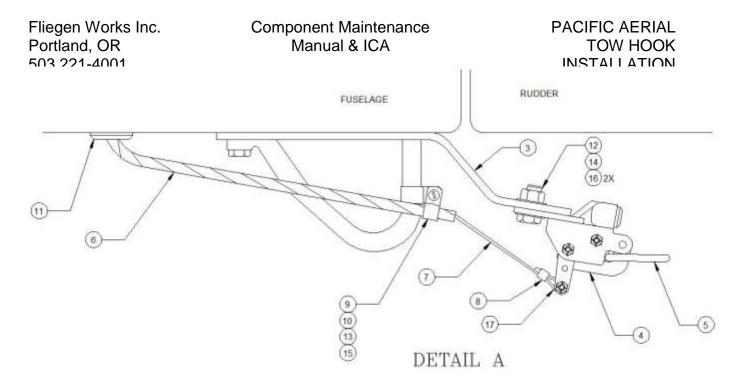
PATH Tow Hook Installation for Piper PA-22, ETC., Detail A
